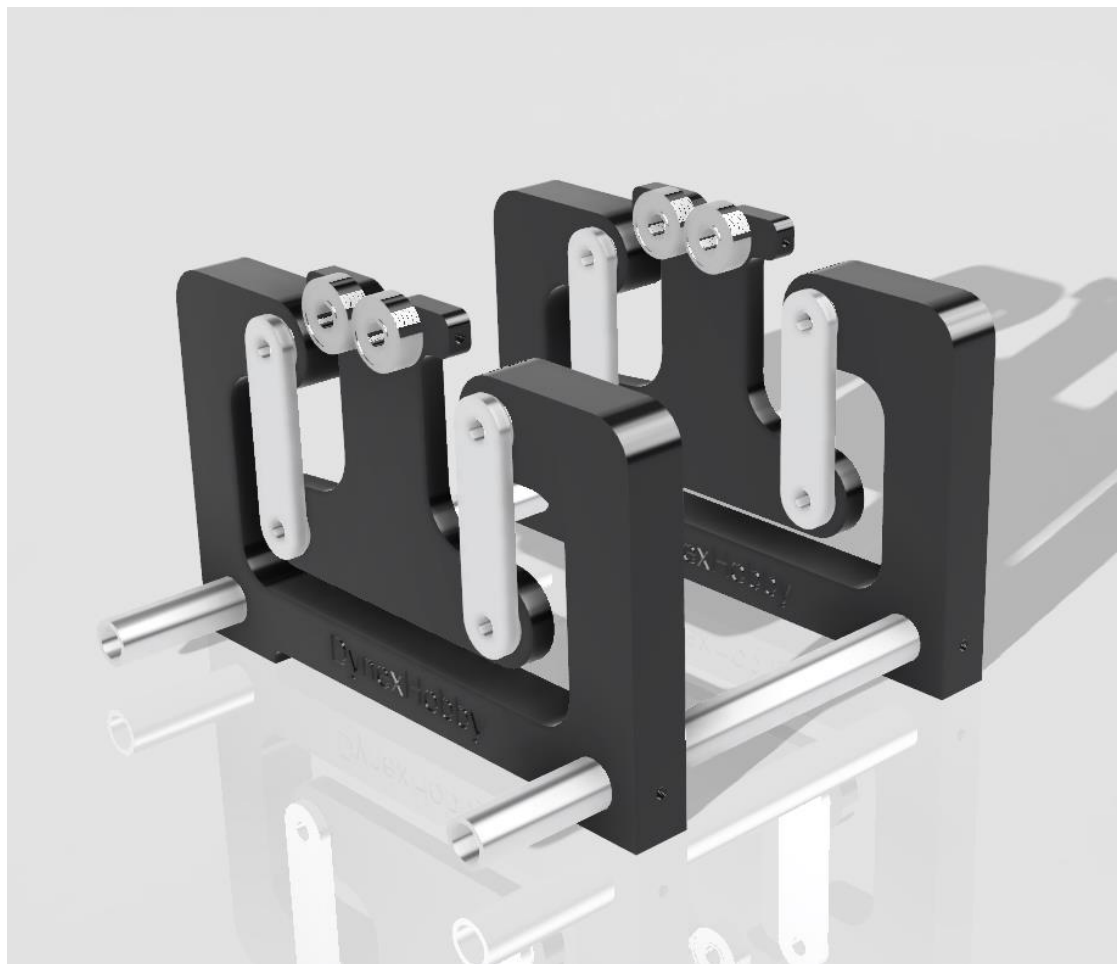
Sample DynexHobby Soft Bearing Balance Cradle
